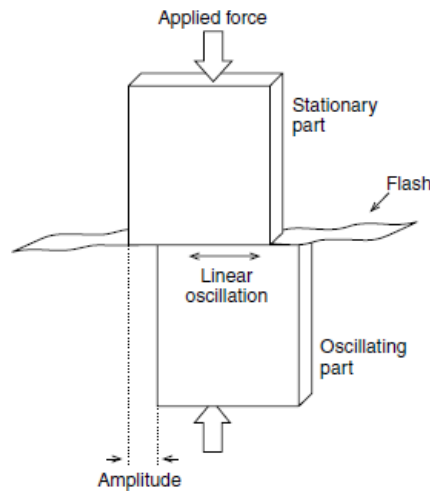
Relative movement of both parts in linear friction welding
